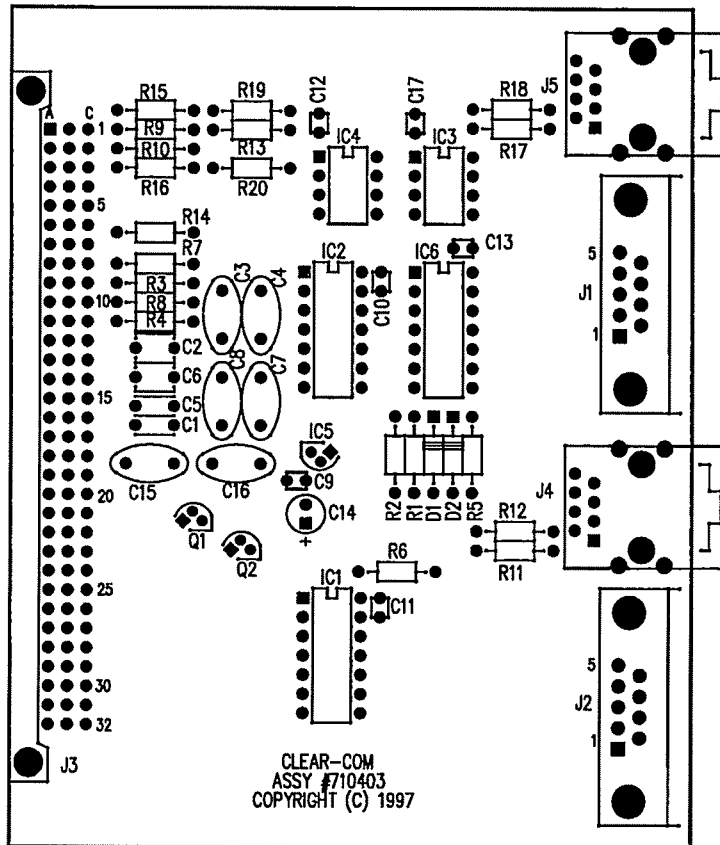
Rear Panel PCB Assembly Drawing, Rev. A
